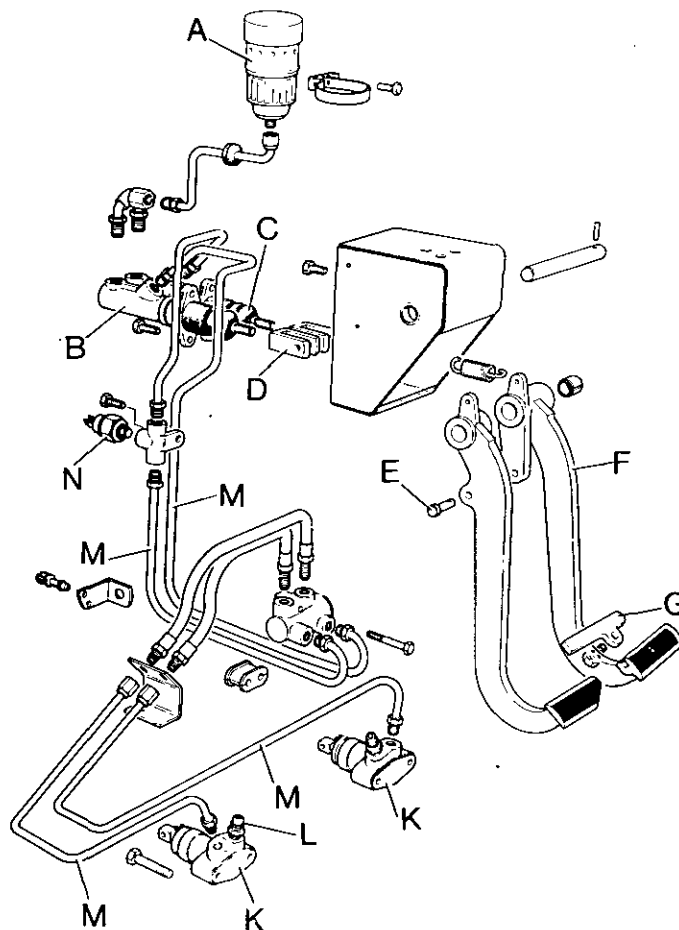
HYDRAULIC BRAKE SYSTEM
